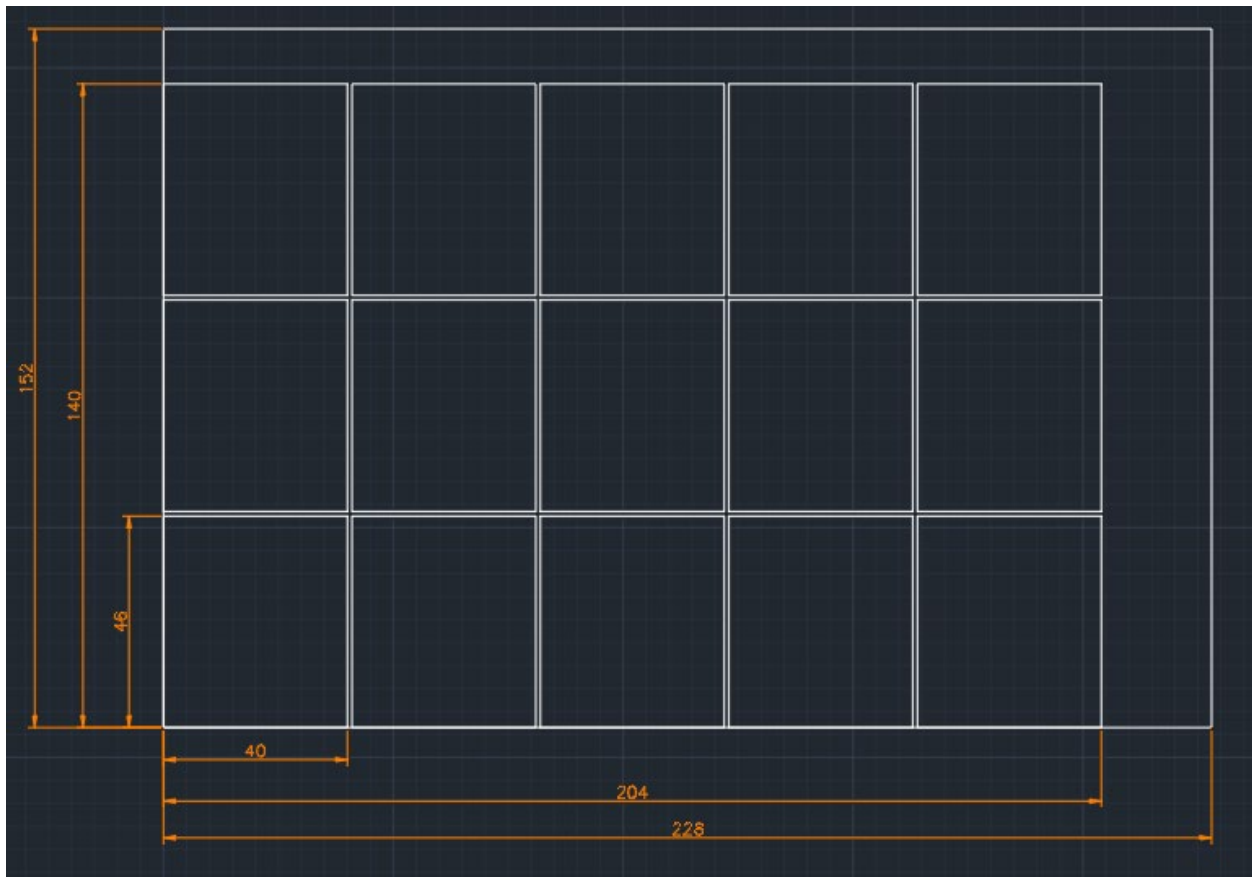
Space budgeting and dimensions of FR4 copper baseboard samples on a copper clad FR4 master card.
